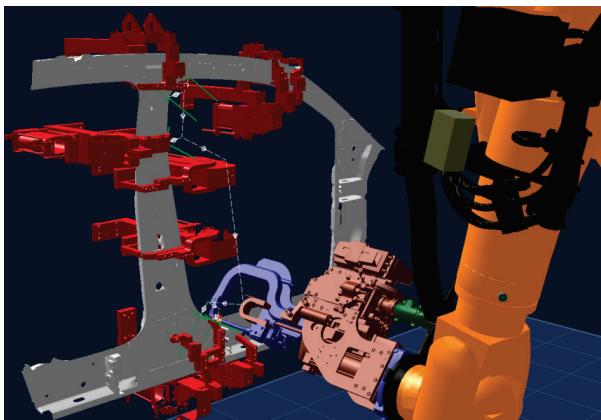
Case Study of Robot spot welding (Robcad)
